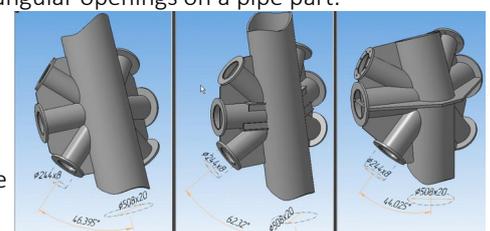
Pipe parts from pipe connections in Vintech rPipe library
